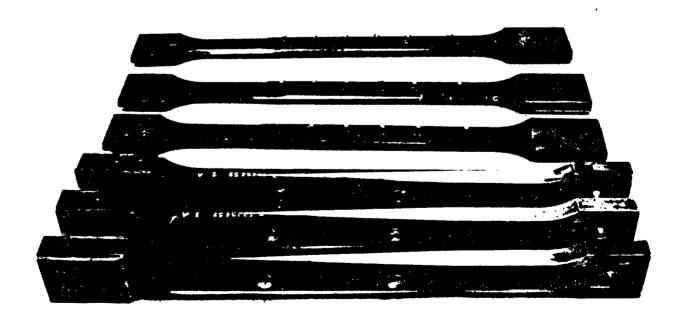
Z5943452-1 AND -501 SPECIMEN
